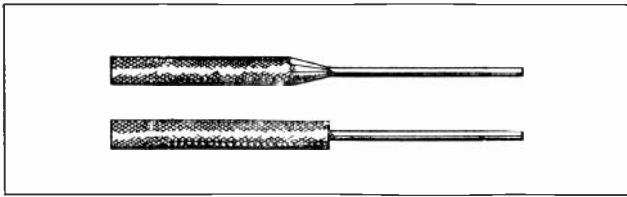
This sketch shows the proper method of stripping the insulation from a wire in the upper view. The lower view shows the wrong way.
